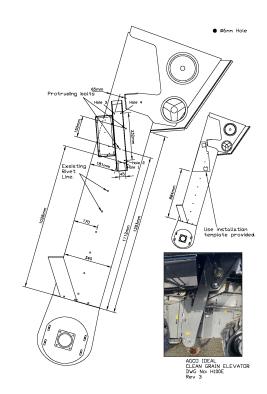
Layout for mounting the Remote Sample Head to the Clean Grain Elevator.
